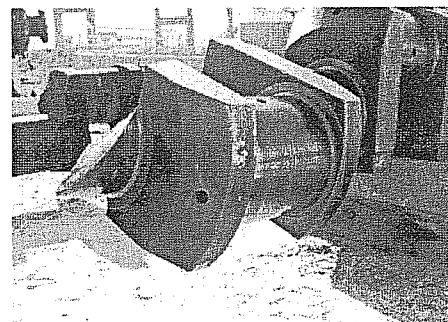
Torsional Fracture of Crankshaft (Note 45° Fracture Line)
